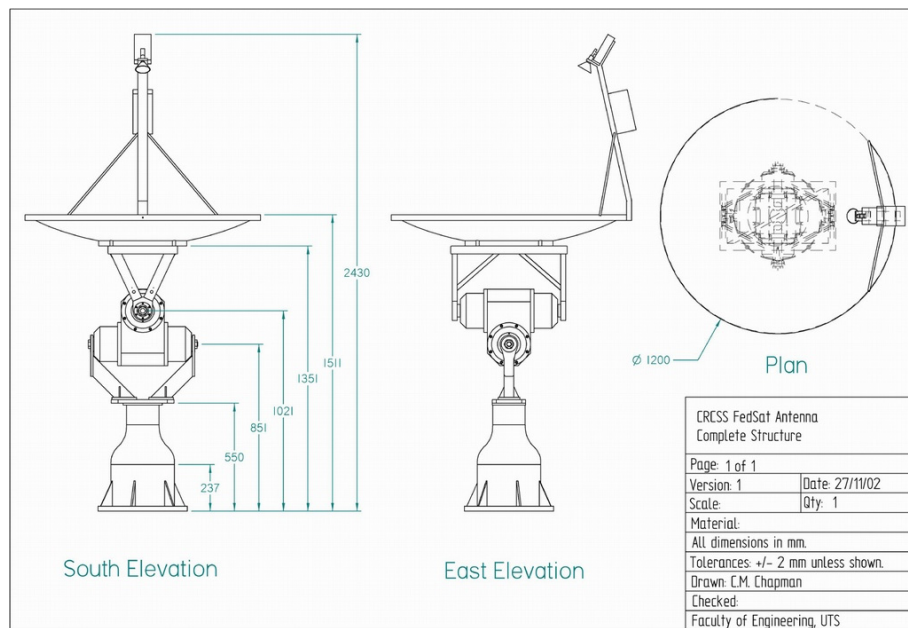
Basic technical drawing of the final X/Y pedestal design
